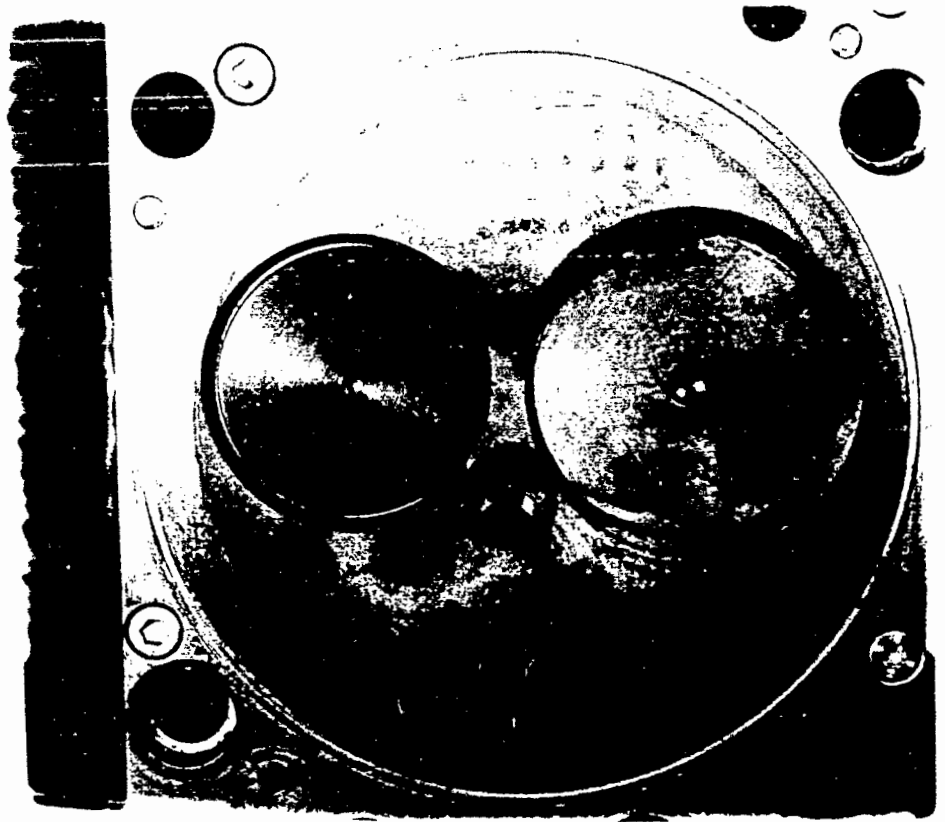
Thermocouple cylinder head following severe methanol knocking which removed some of the gold plating.
